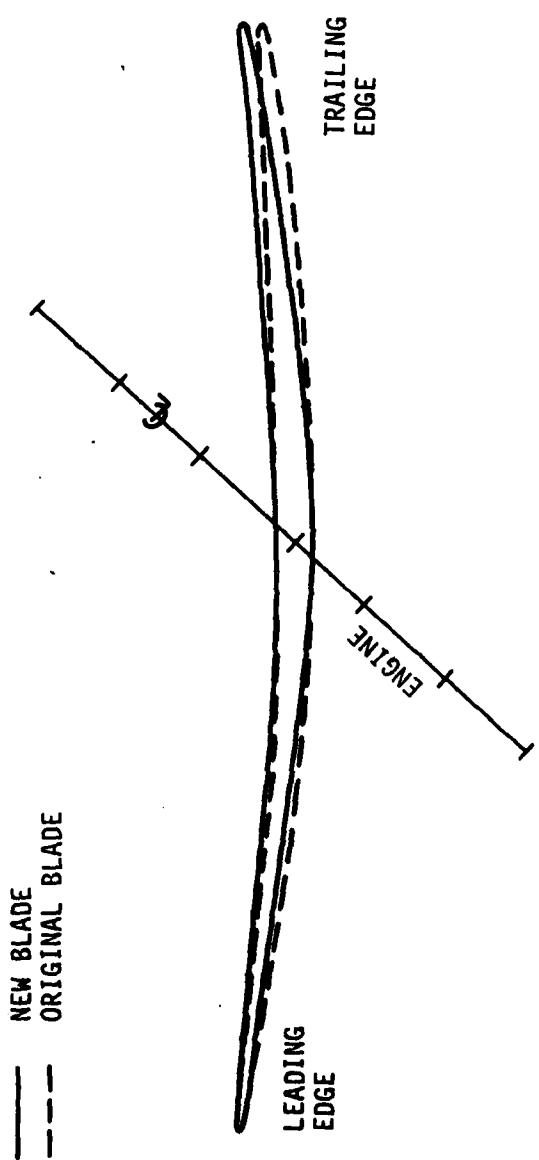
Comparison of New Blade Pitch Section to Original Pitch Section.
